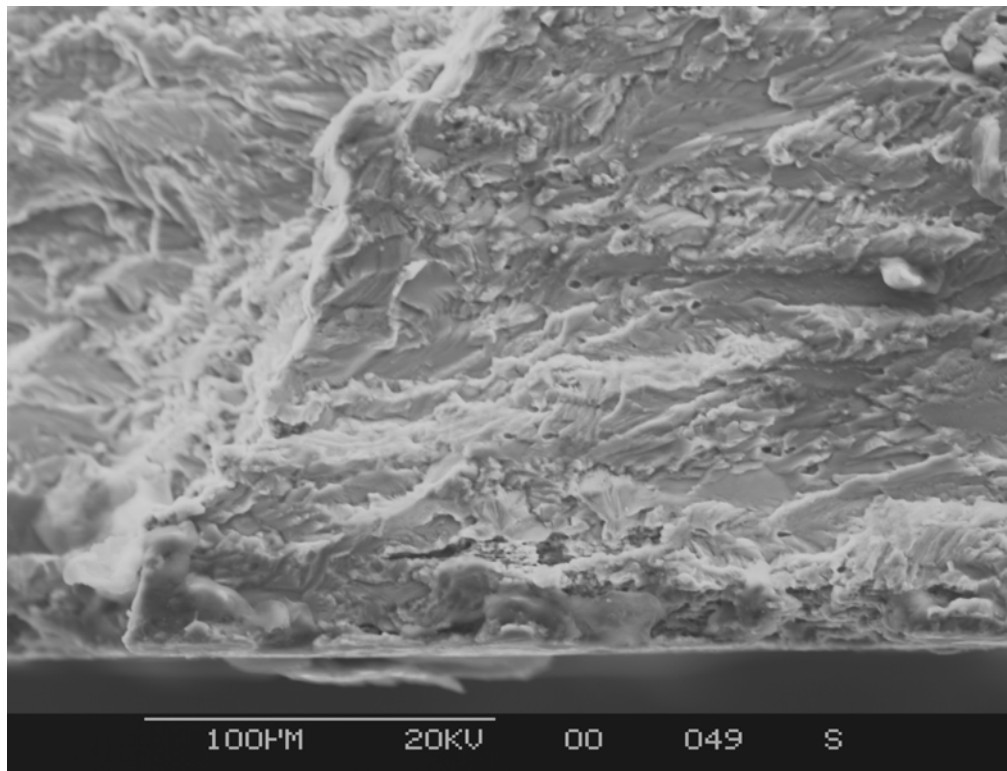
Crack Origin B (Fig. B-91) on Specimen 5967.
